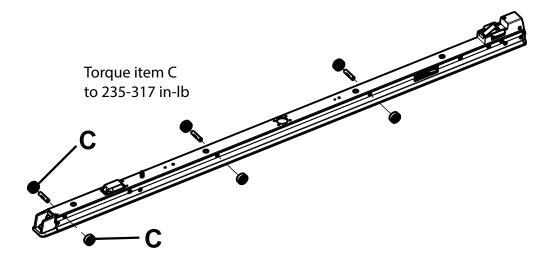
Remove the flat roller assembly and V-guide roller assembly
